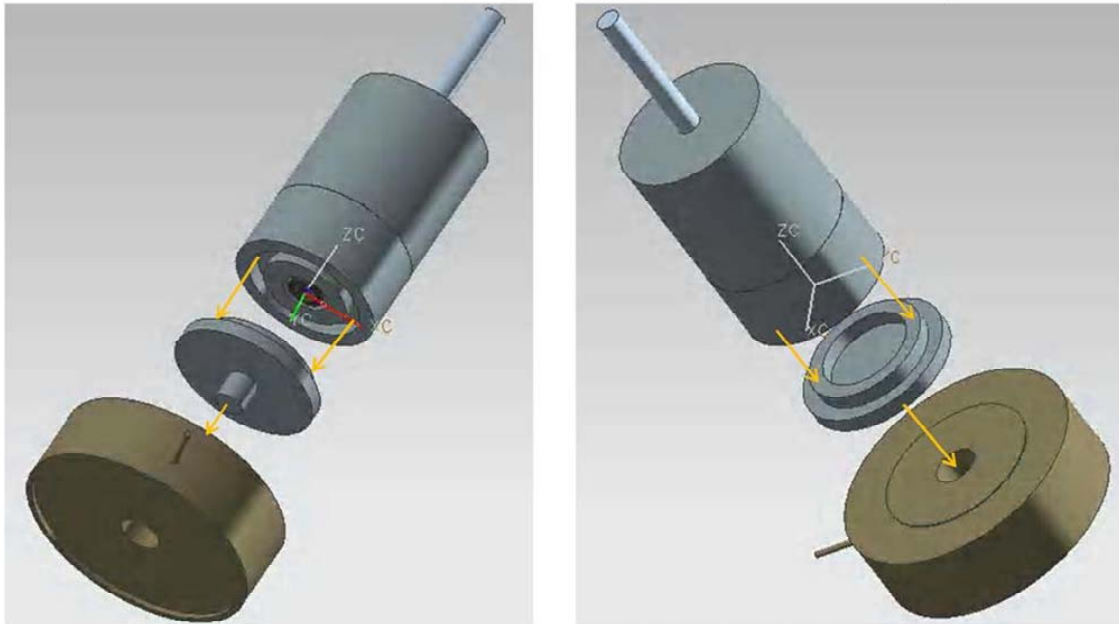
Load Cell and Load Cell Adaptor Attachment
